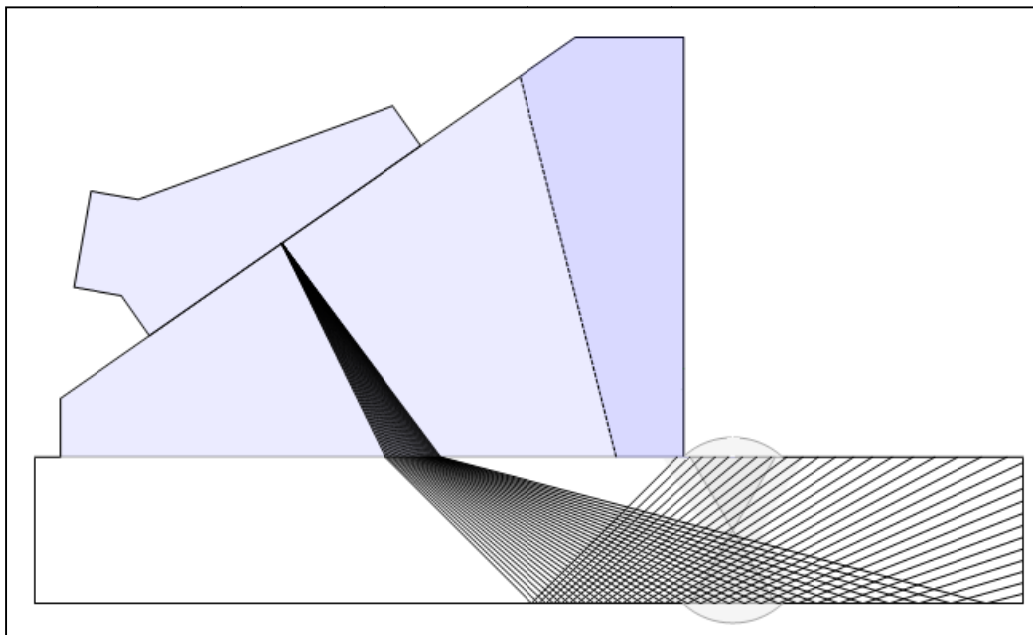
The sector pulse-echo configuration for the butt welds.
